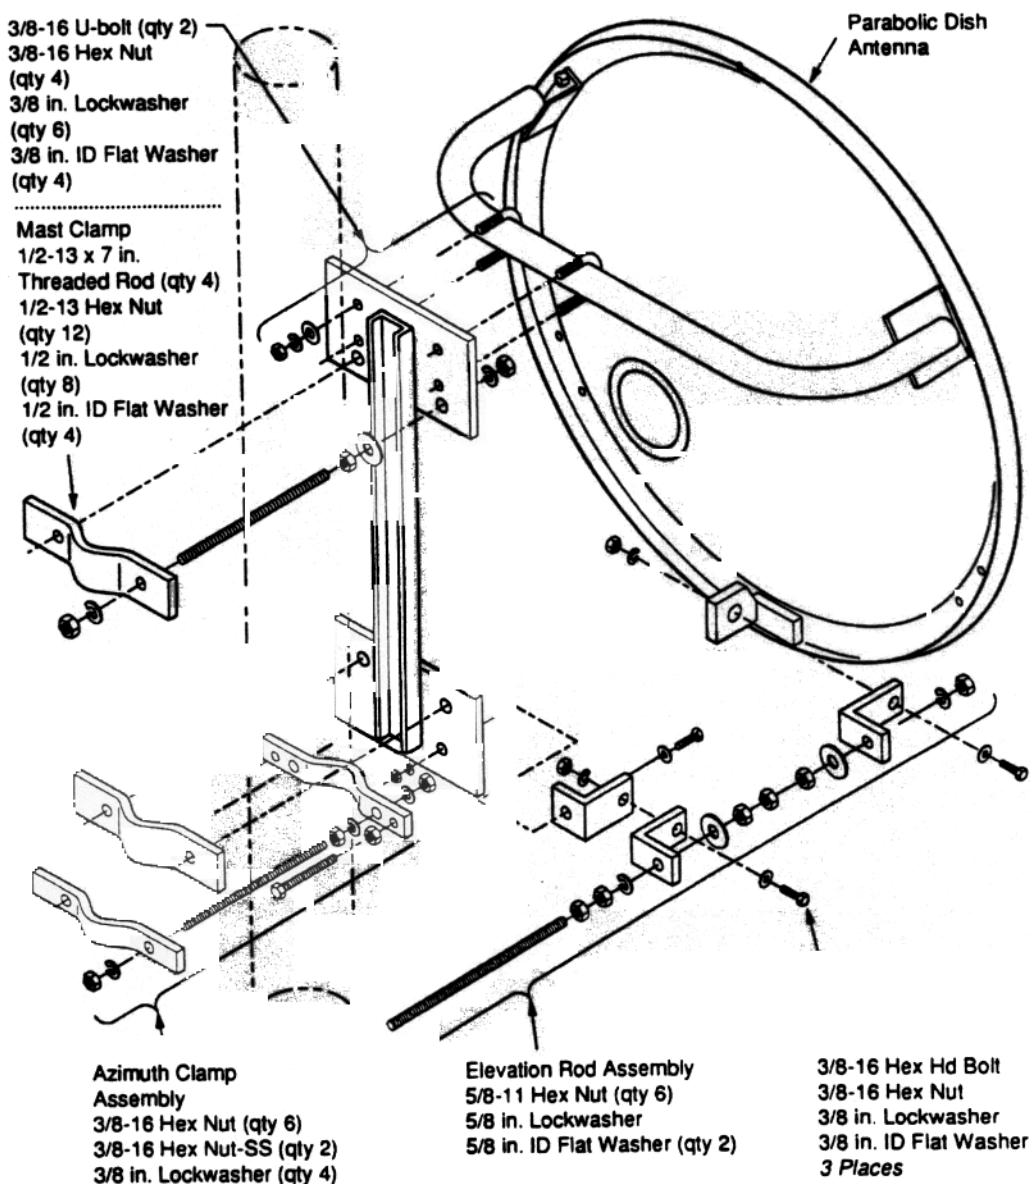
Typical Parabolic Dish Antenna Mounting Exploded View
